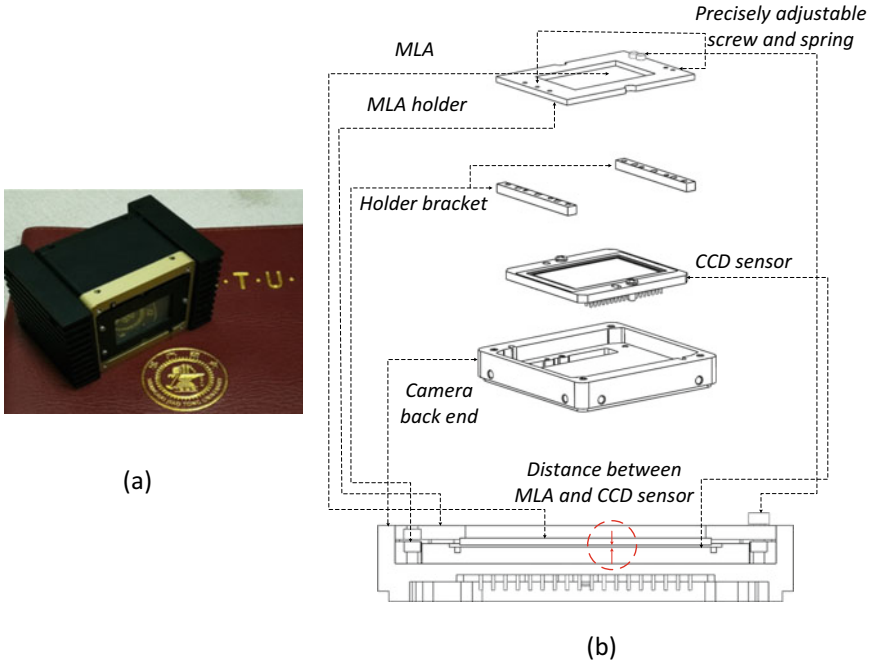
a In-house assembled light-field camera; b exploded schematic of camera and MLA mounting apparatus
